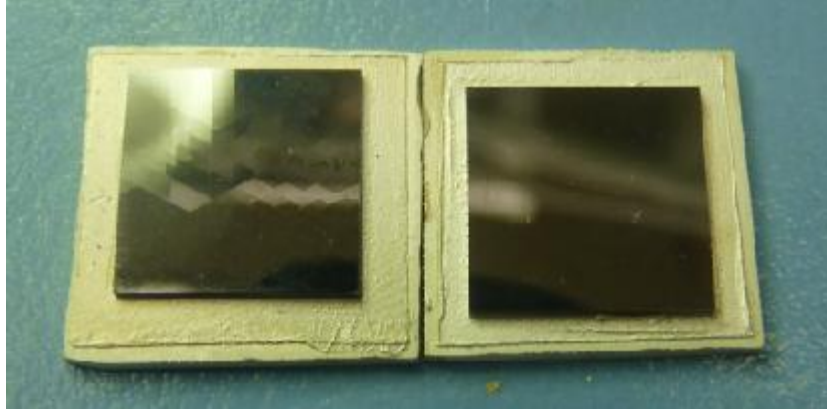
Silicon cracks in die-attachment without cracking and silicon without cracking in die-attachment by stress relief annealing.
